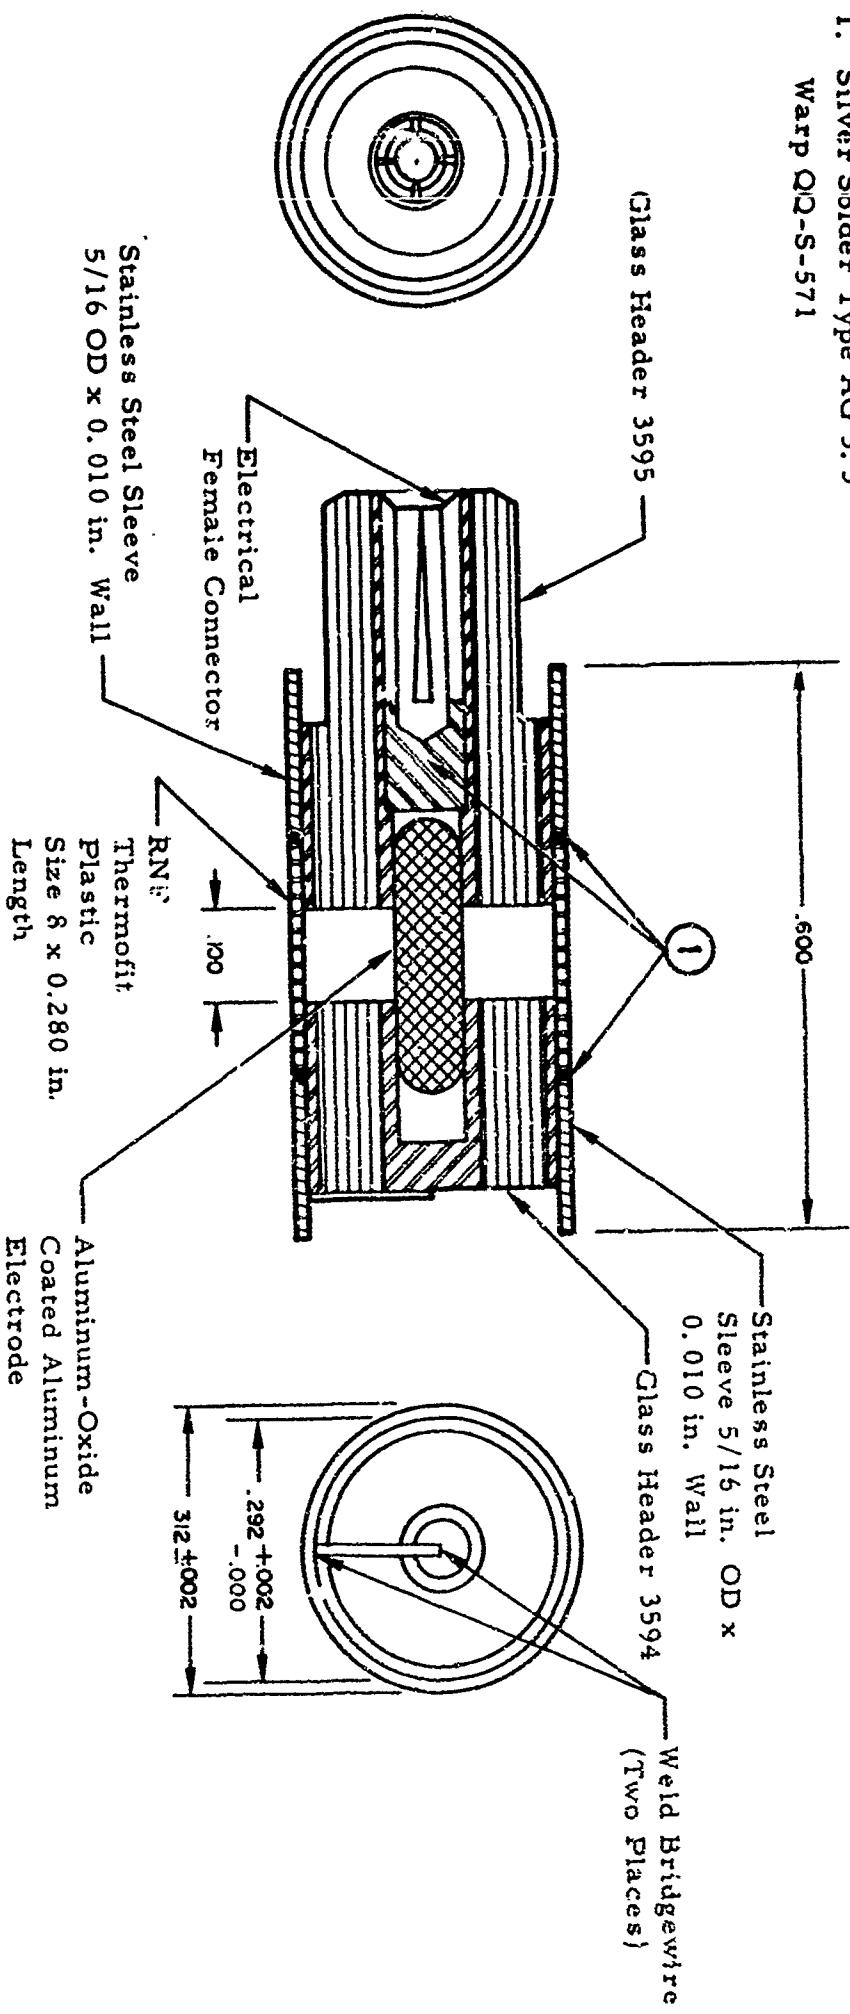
Drawing P-1007, Voltage Switch Electrode Header Assembly.
